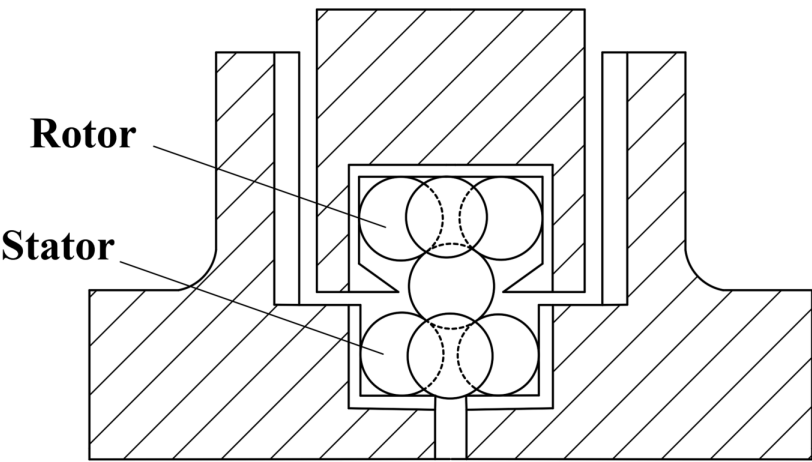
Energy storing flywheel and bearing assembly US20140260779A1.
